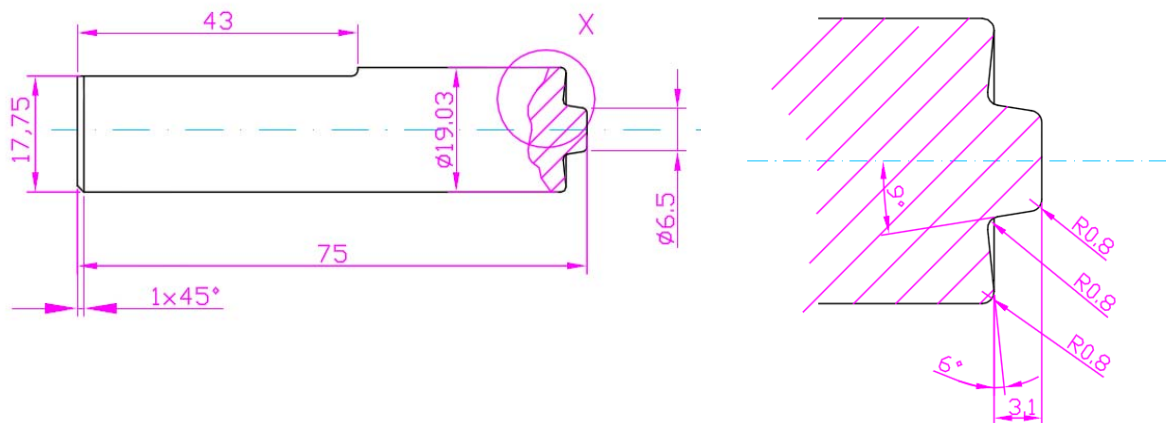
Tool geometry for friction stir welding experiments in 4mm thick steel DIN 1.4301
